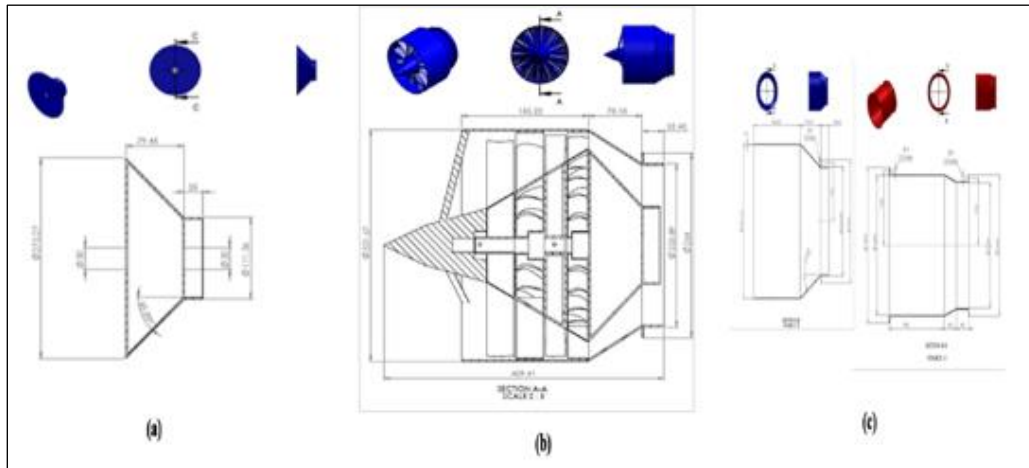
Jet component parts ((a) Inlet, (b) Compressor (c) Combustion Chamber)
